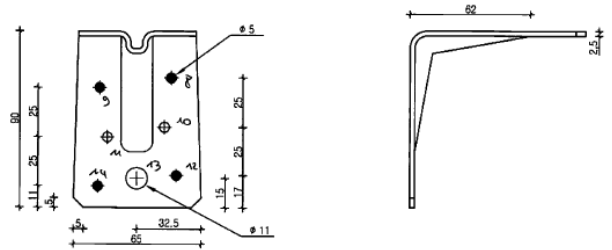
Dimensions of angle bracket 90x90x60x2,5 (with rib)
